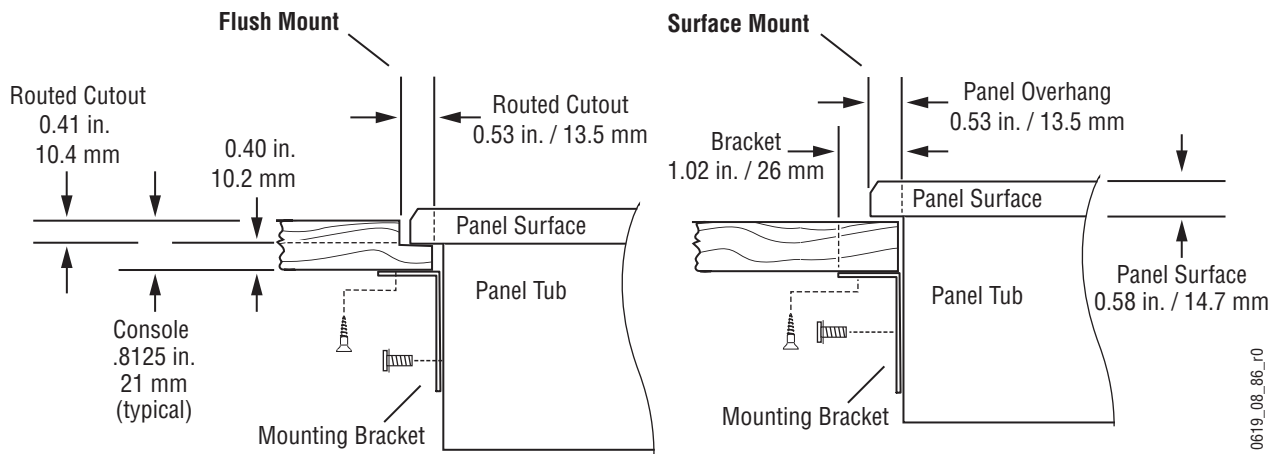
1-M/E Panel Mounting Options, Front Left View
